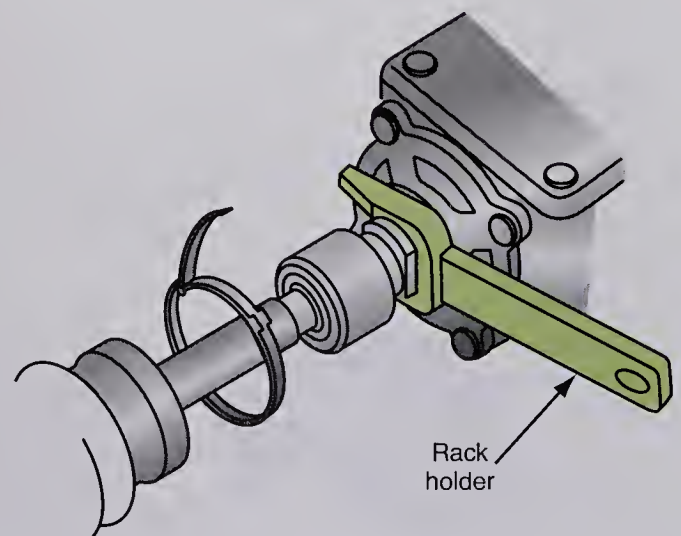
Installing the special tool to hold the shaft screw while tightening the inner tie-rod end.
